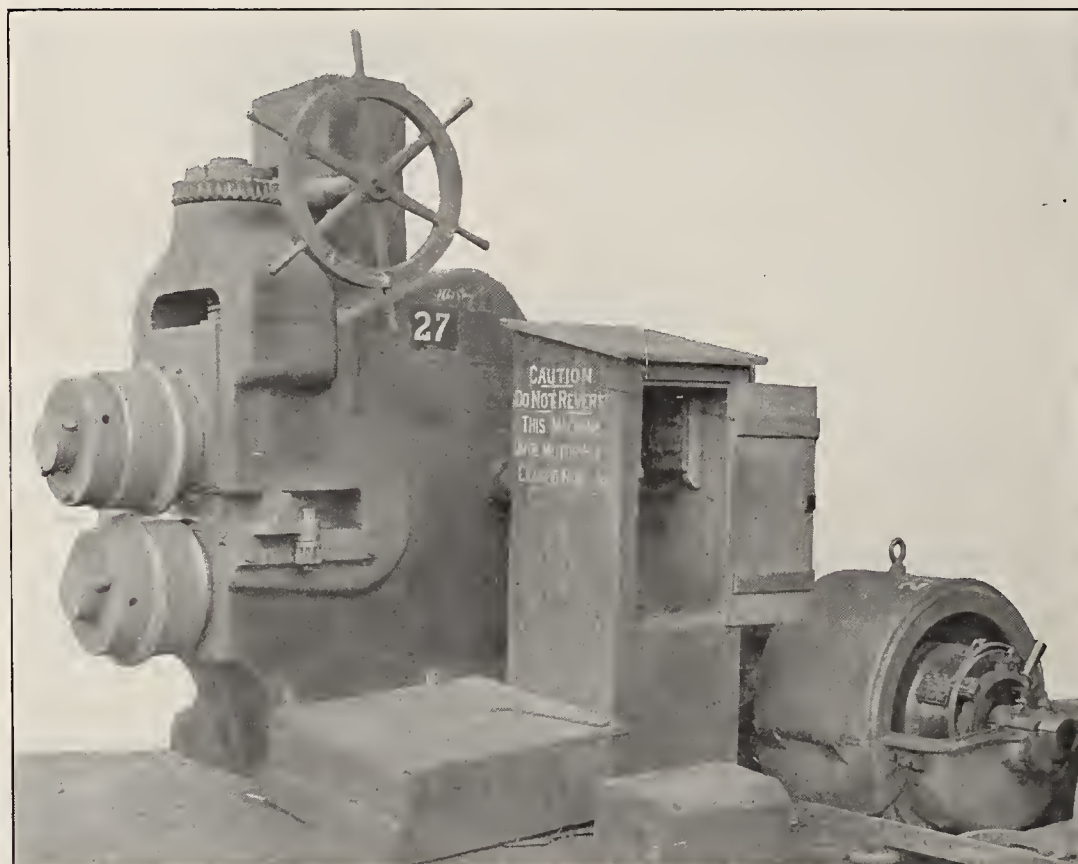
DOXFORD'S JOGGING MACHINE, BUILT BY MESSRS. FRANCIS BERRY & SONS, SOWERBY BRIDGE, DRIVEN BY A 25-H. P. CONTINUOUS-CURRENT MOTOR MADE BY THE SUNDERLAND FORGE AND ENGINEERING COMPANY, LTD.
